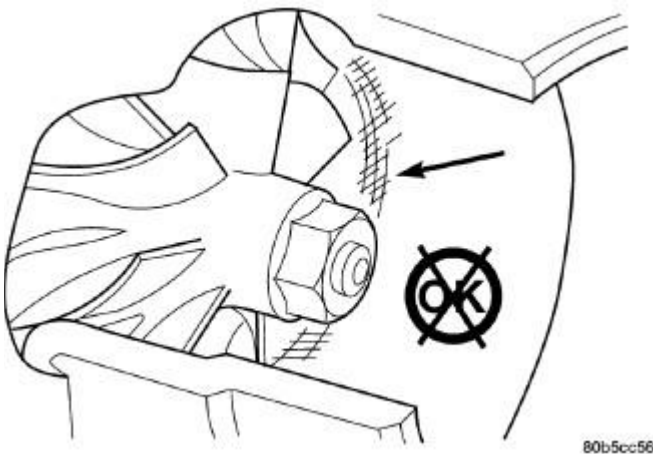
Inspect Compressor Housing for Impeller Rubbing Condition
